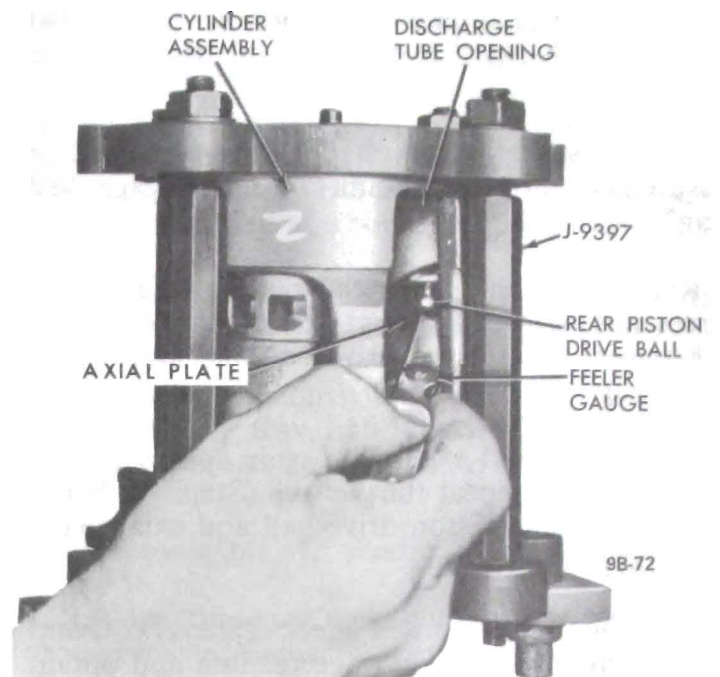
B-82 Checking Clearance Between Rear Piston Drive Ball and Axial Plate
